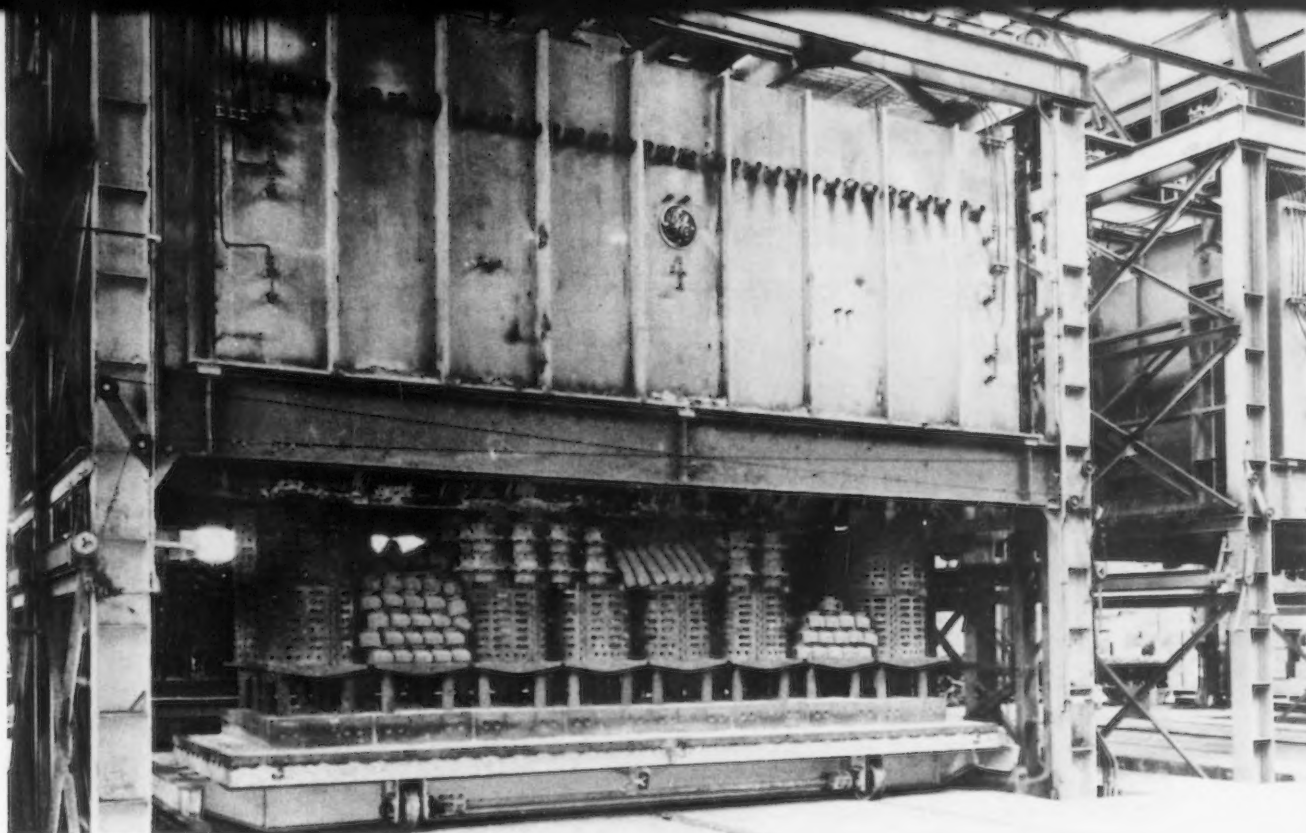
View showing loaded car which has just been removed from low-temperature furnace.
